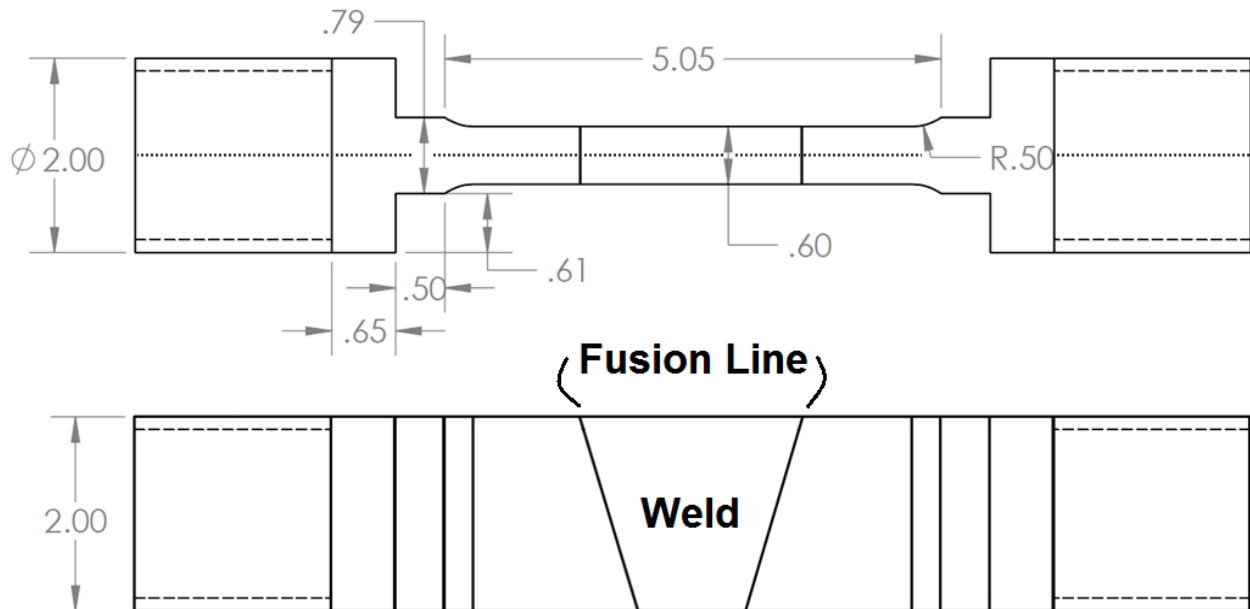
Feature, cross-weld creep test dimensions. Weld is indicated by the outlined location of the fusion line and as centered in the gauge length.
